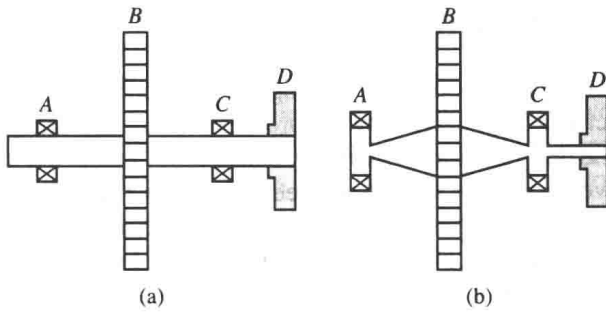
(a) Geometry of gearbox shaft; (b) “optimal” design based on elementary bending and torsion calculations
